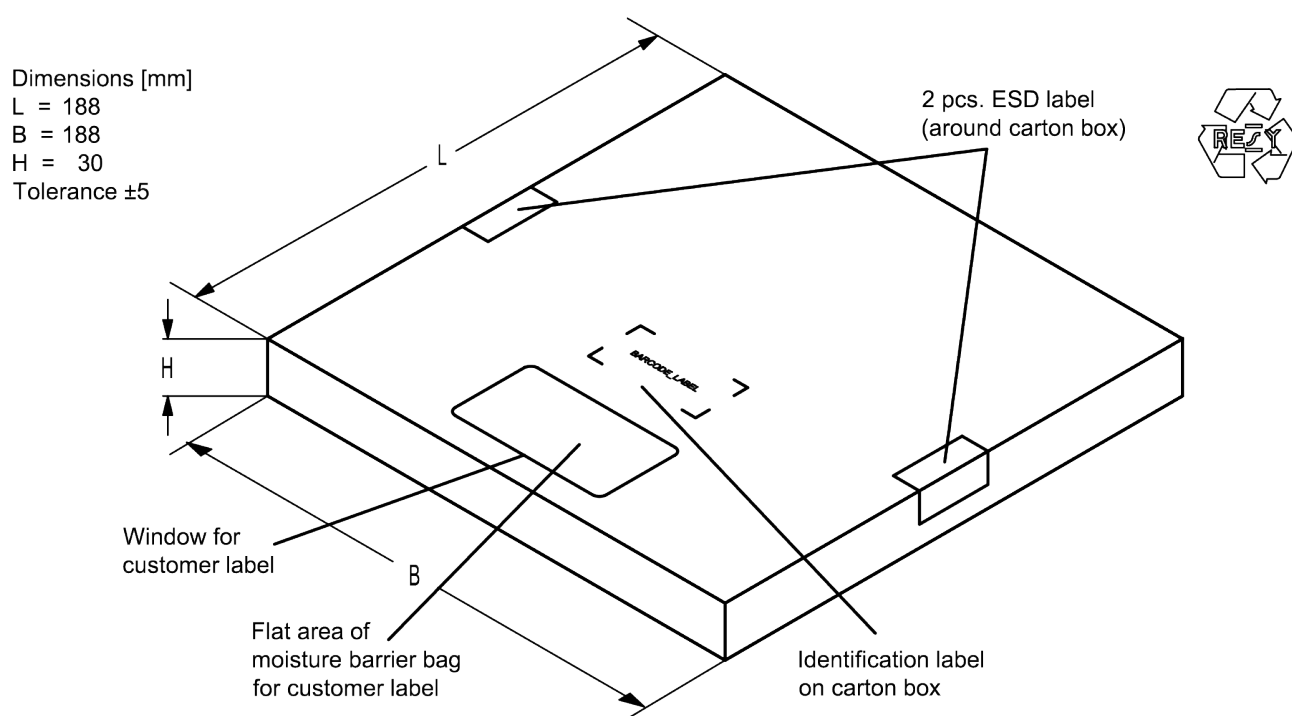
Drawing of folding box for reel with diameter of 180 mm.
